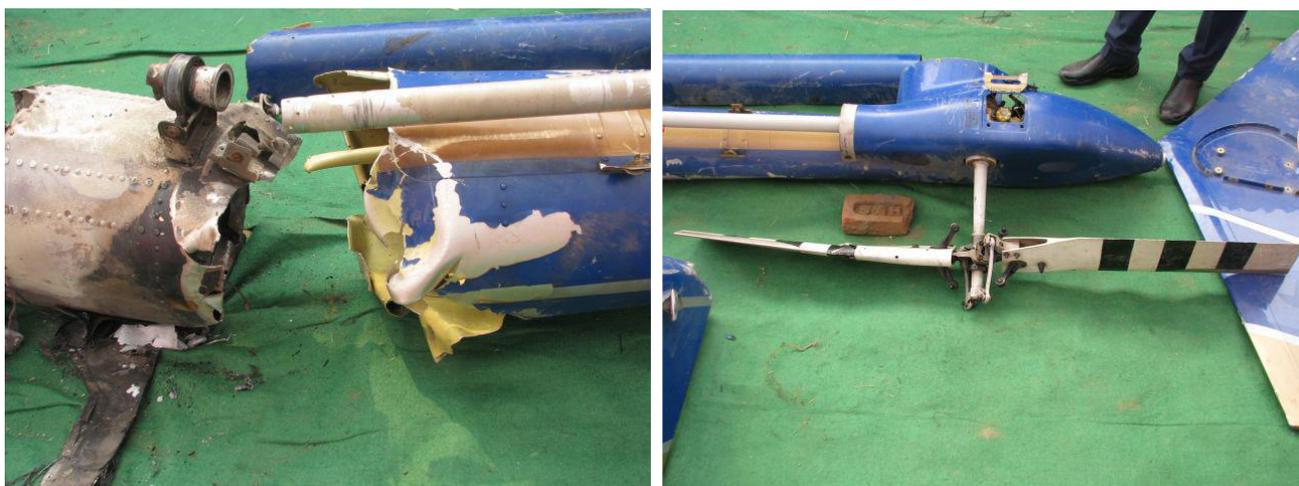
Forward coupling and driveshaft tube with sheared rivets (L) and Tail Rotor (R)
